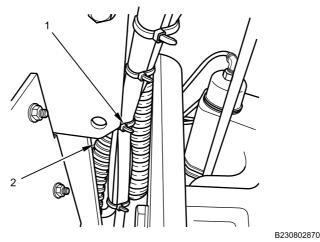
Transfer Case Oil Cooler Return Hose Routing.
